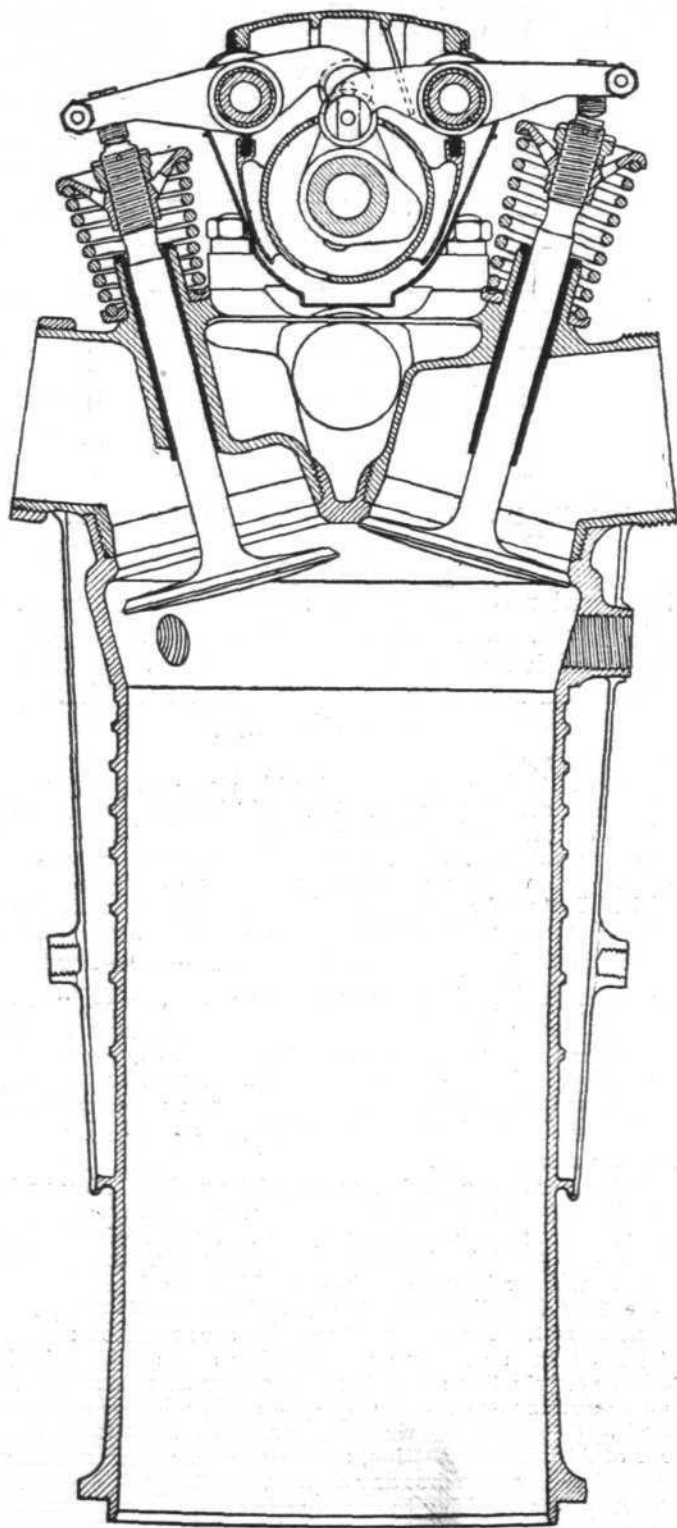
Section of cylinder, and arrangement of overhead valve gear and camshaft casing.
